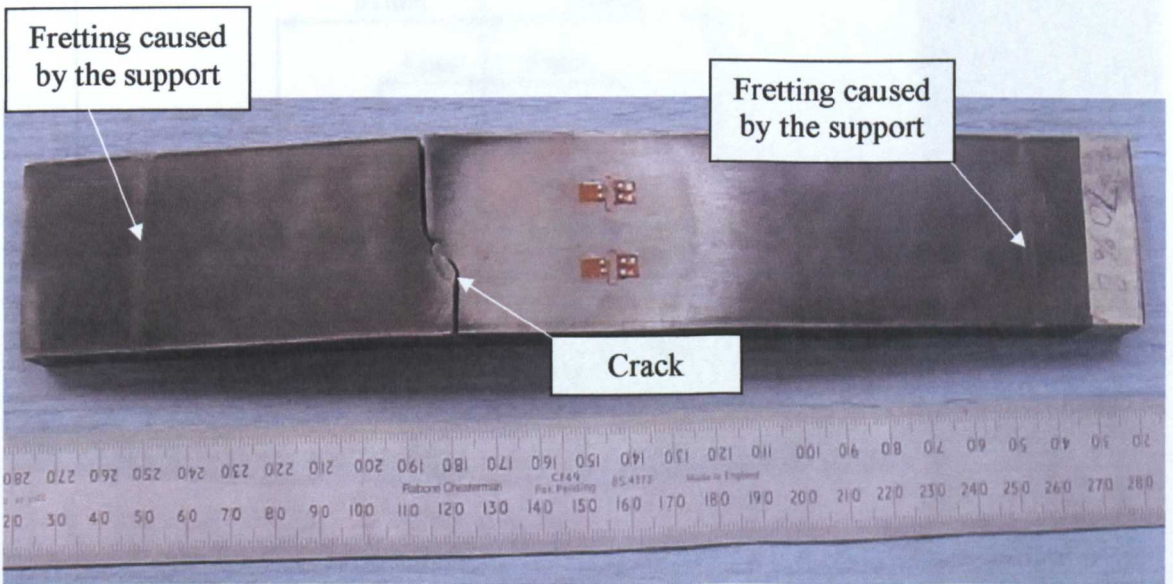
EN 8 steel specimens showing propagated crack at the centre. Crack location is far away from the wear effect caused from loading
